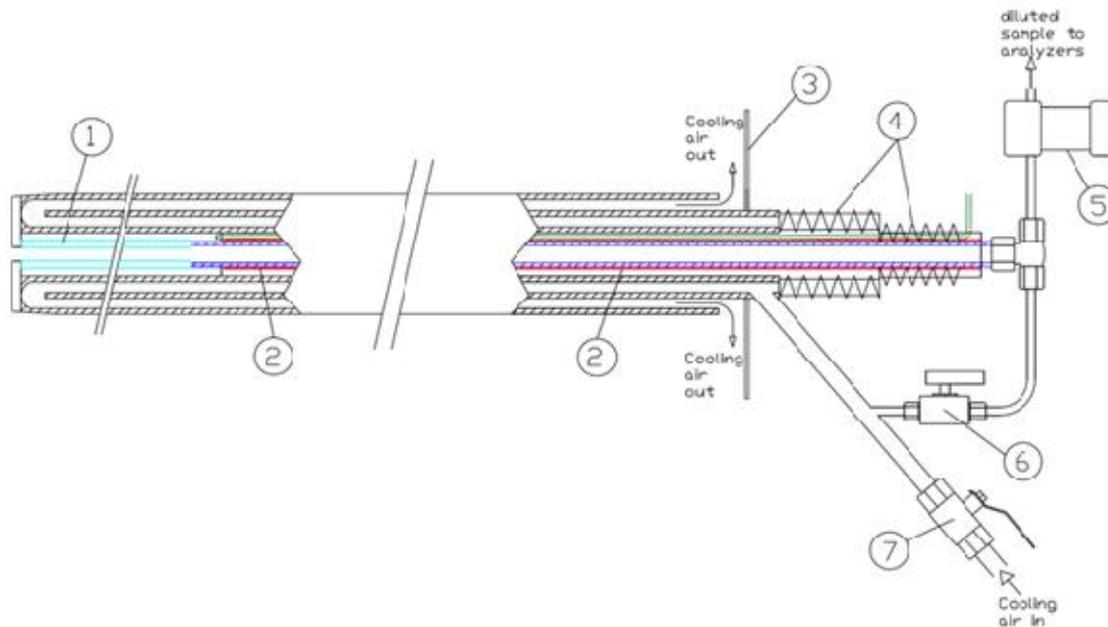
Cross-section of the gas sampling probe. (1) Dilution section in the probe tip, (2) Heated center pipe, (3) Steering plate for cooling-air, (4) Expansion springs, (5) Heated fine filter, (6) Back purge valve, (7) Cooling-air valve
